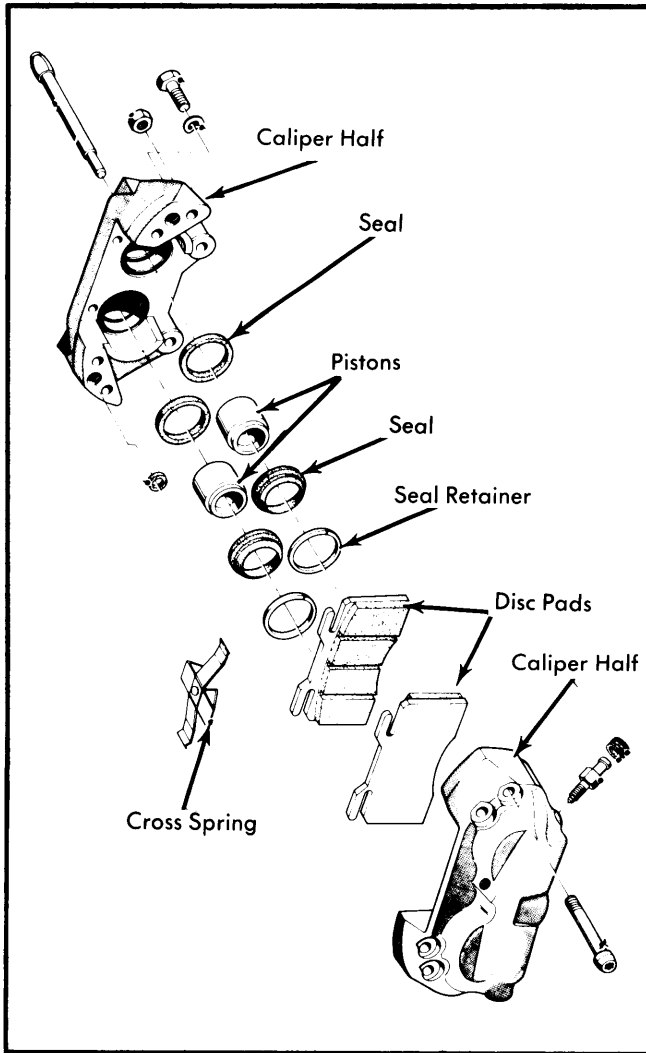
Four Piston Front Disc Brake Caliper Assy. for 530i & 630CSi
